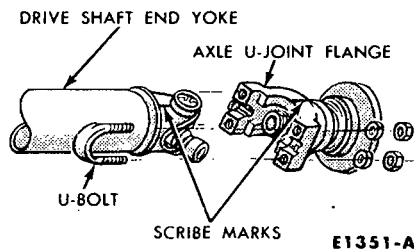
Drive Shaft-to-Axle U-Joint Connection
